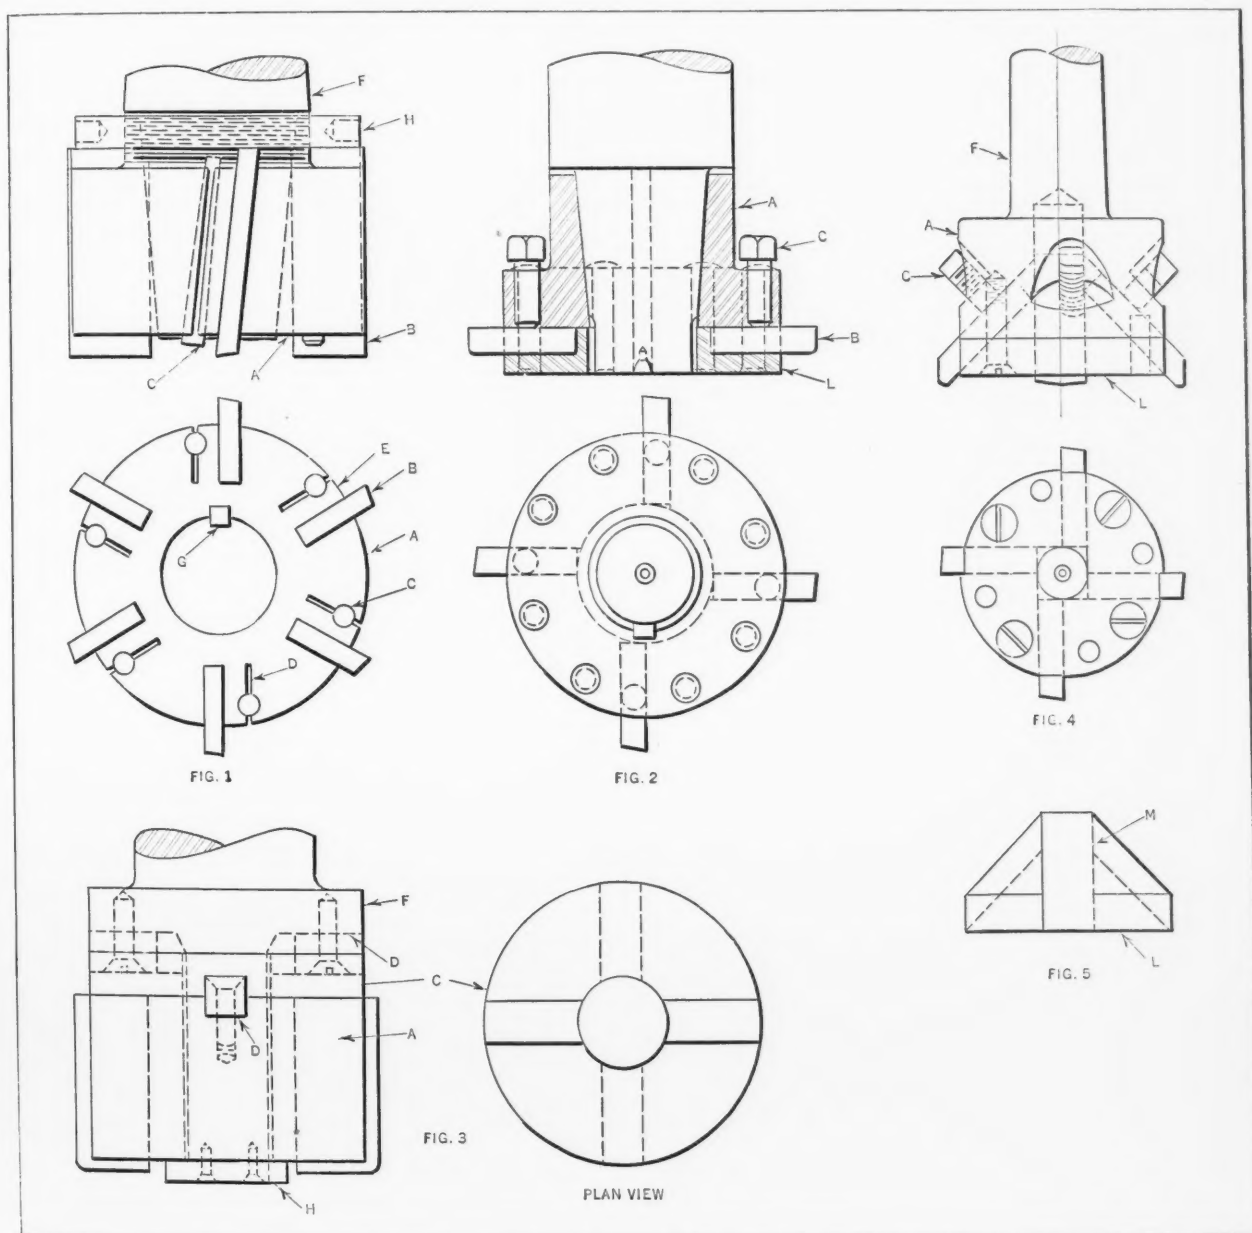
Conventional Type of Boring Head. Fig. 2. Boring Head Using Small Tool Bits. Fig. 3. Floating Type of Cutter-head. Fig. 4. Cutter-head for Boring Close to Bottom of Hole. Fig. 5. Lower Member L of Head Shown in Fig. 4
